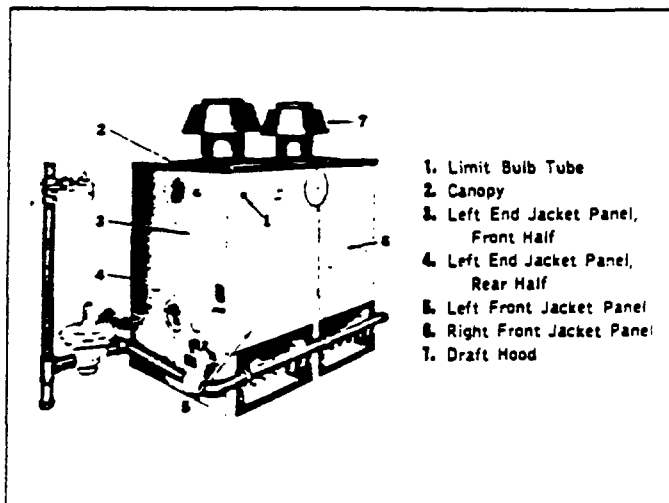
Jacket Assembly; 13 through 21 section water boiler shown
